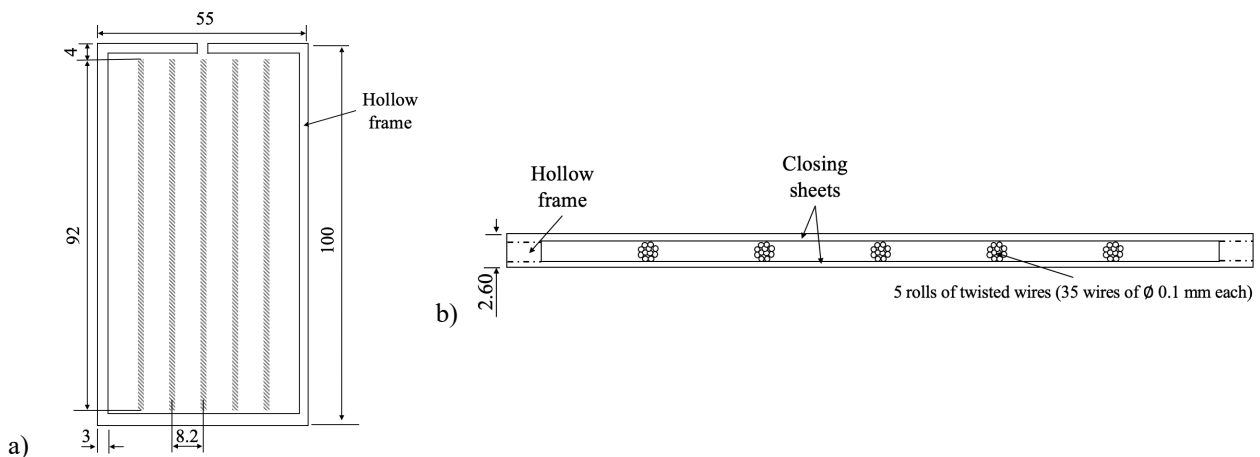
Schematic design of the flat heat pipe with twisted wires: a) internal view and b) cross-section.
